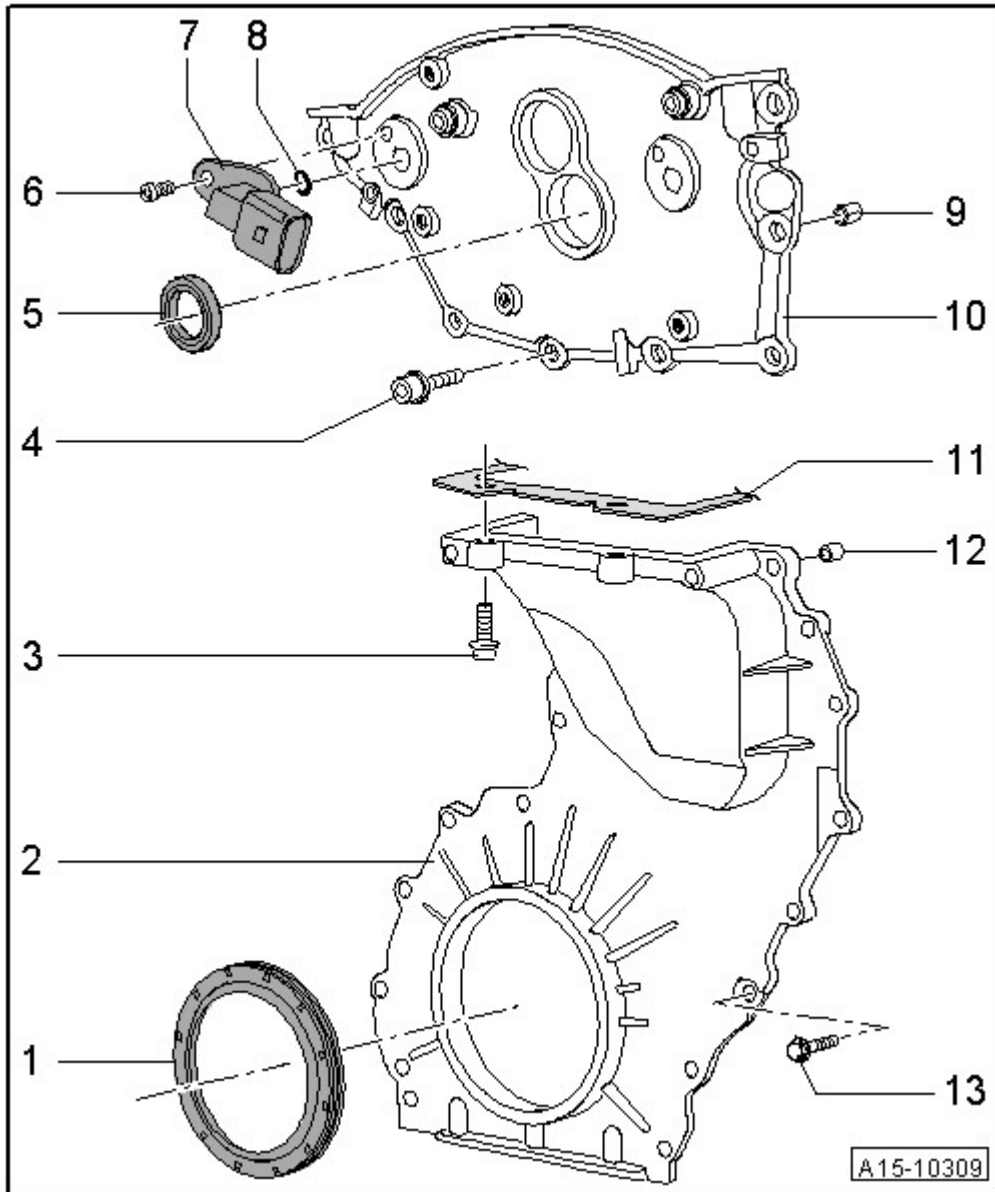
Identifying Timing Chain Cover And Sealing Flange
